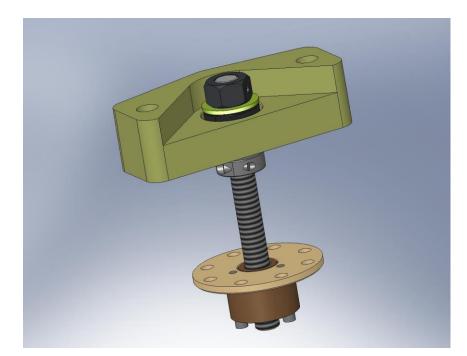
Pull-Down Nut threaded onto end of ACME Screw. The bottom part of the Spring Pull-Down Assembly is complete.
